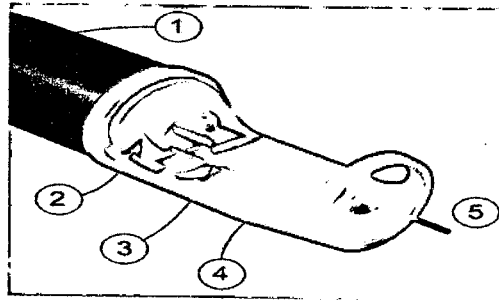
GMAW torch nozzle cutaway image. (1) Torch handle, (2) Molded phenolic dielectric (shown in white) and threaded metal nut insert (yellow), (3) Shielding gas nozzle, (4) Contact tip (5) Nozzle output face.
